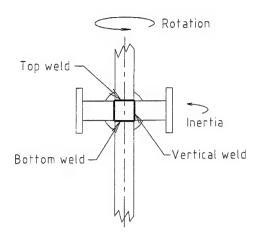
Main shaft, paddle hub block welds (side view)
